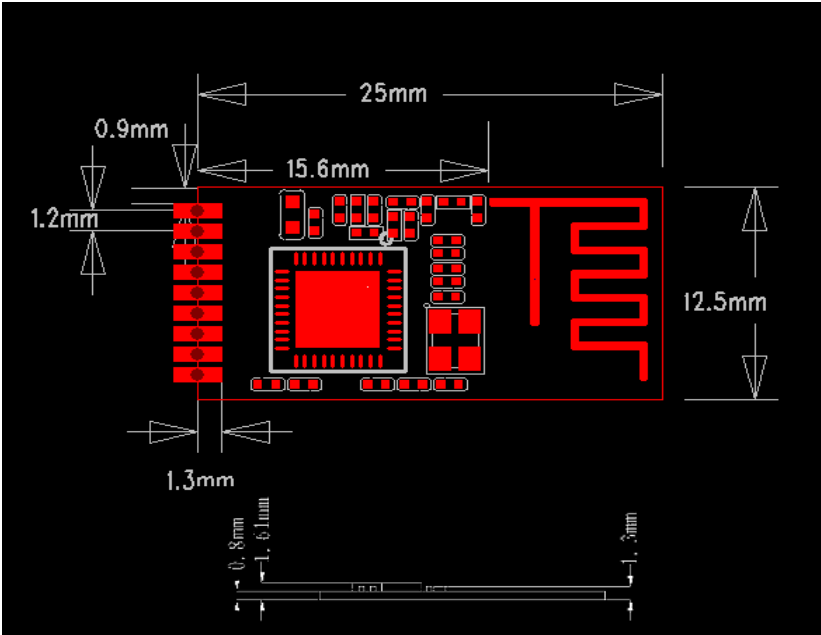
RECOMMENDED PCB FOOTPRINT
